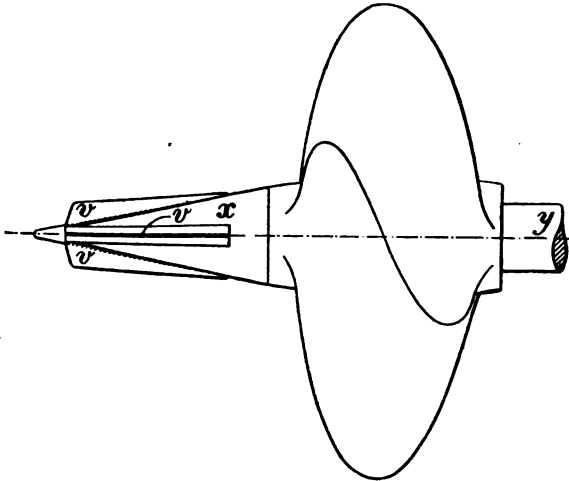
Parsons' Construction of Propeller Boss to diminish Cavitation.
